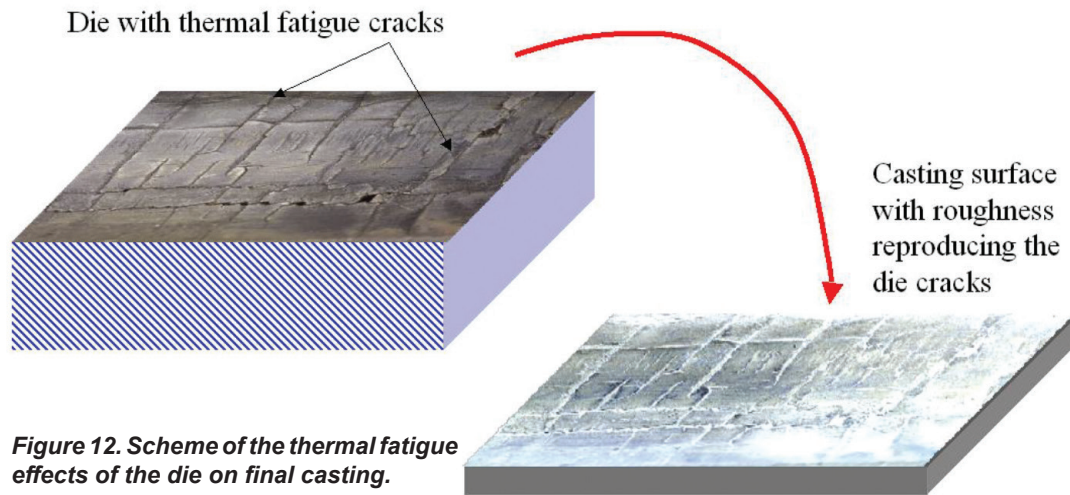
Scheme of the thermal fatigue effects of the die on final casting.
